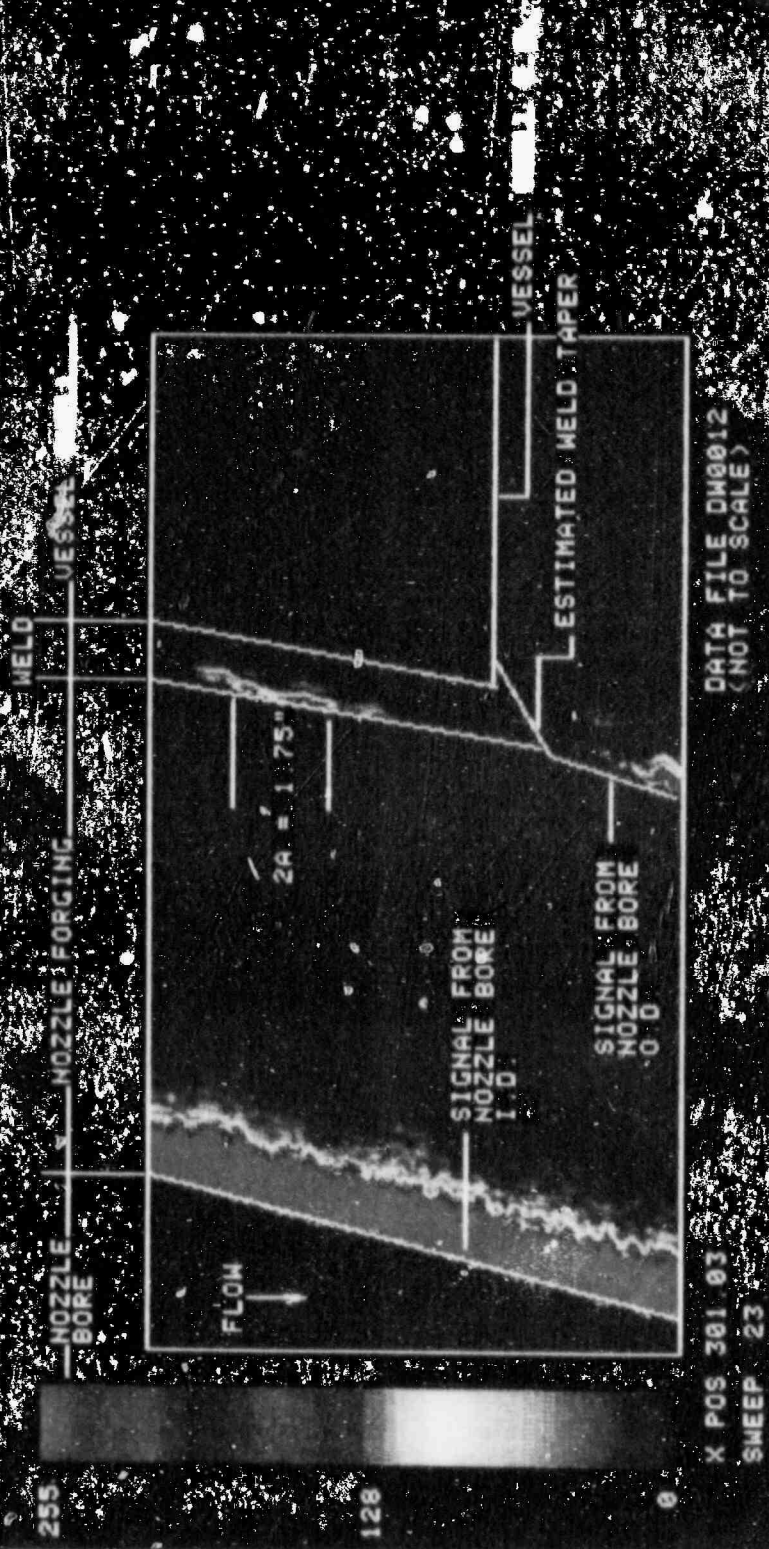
INDICATION 2CC IN OUTLET NOZZLE TO SHELL WELD 01-021 WITH
